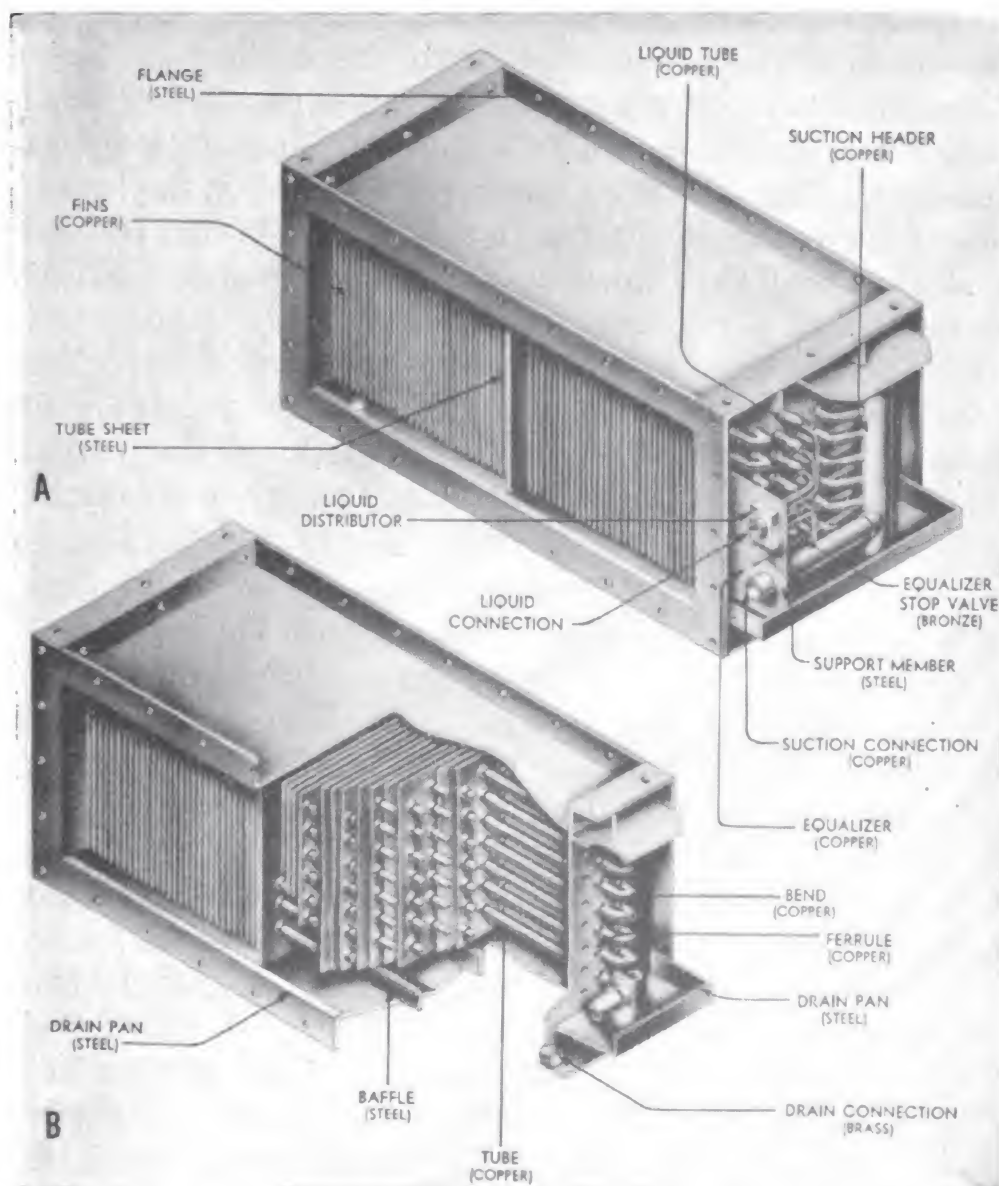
Duct-type plate-fin air cooler: (A) exterior view; (B) cutaway view, showing arrangement of plate fins.
